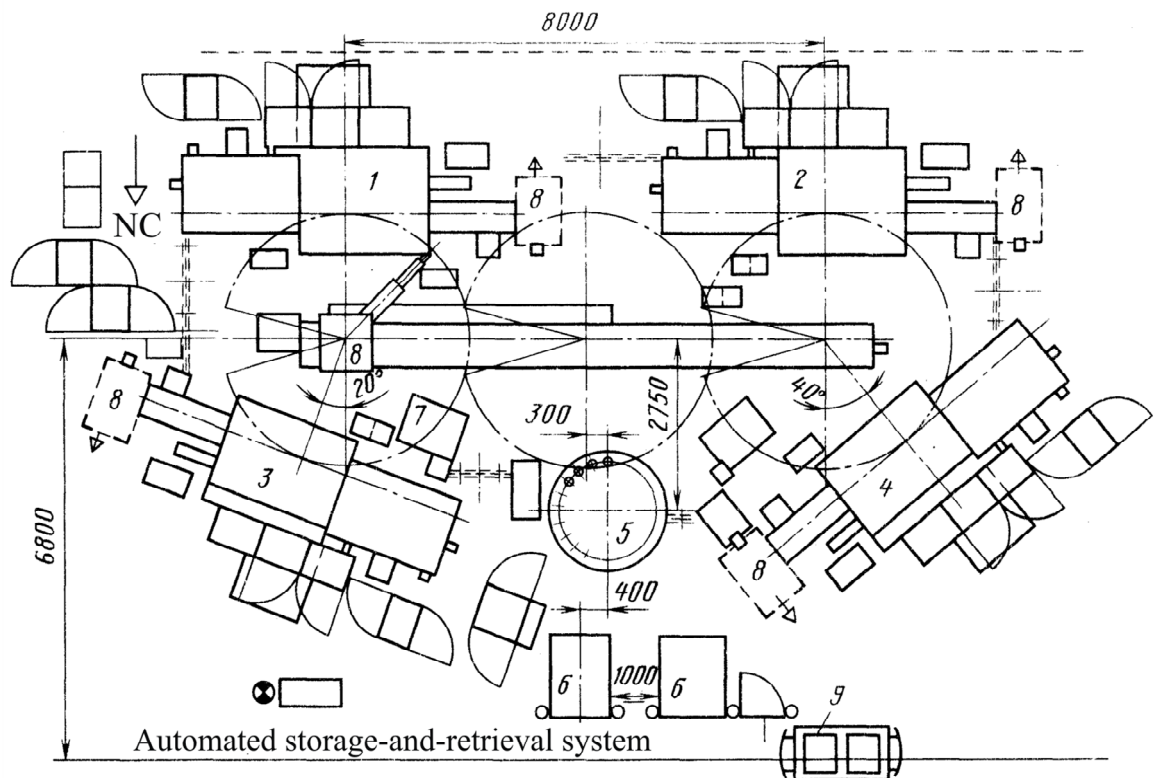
A layout example of a working place (layout of RTC for chucking)
